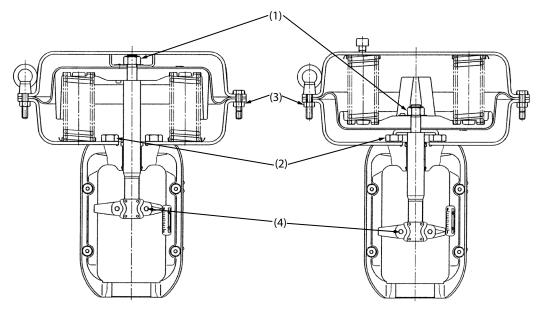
Threaded parts to tighten (on PSA1-4 actuators)
